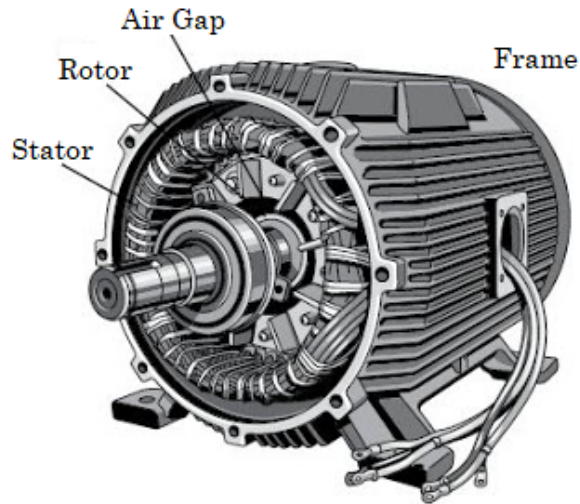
Partially Assembled Motor. An electric motor consists mainly in three parts: a rotor, which moves due to the electromagnetic interaction; a stator, the body of the motor; and a frame, which holds the rotor and the stator together. The air gap is the space between the rotor and the stator, where the electromagnetic interaction takes place.
